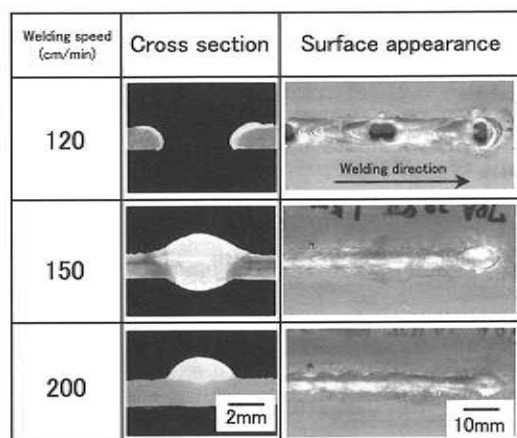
Macrostructure of cross section and surface appearance of bead-on-plate weld bead at welding current 78 A.
